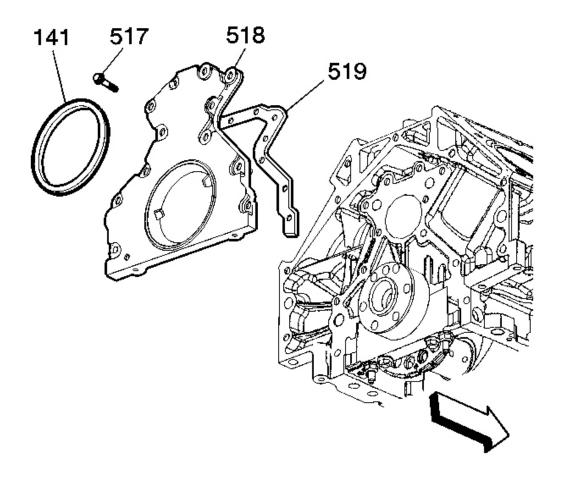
Exploded View Of Engine Rear Cover Courtesy of GENERAL MOTORS CORP.
